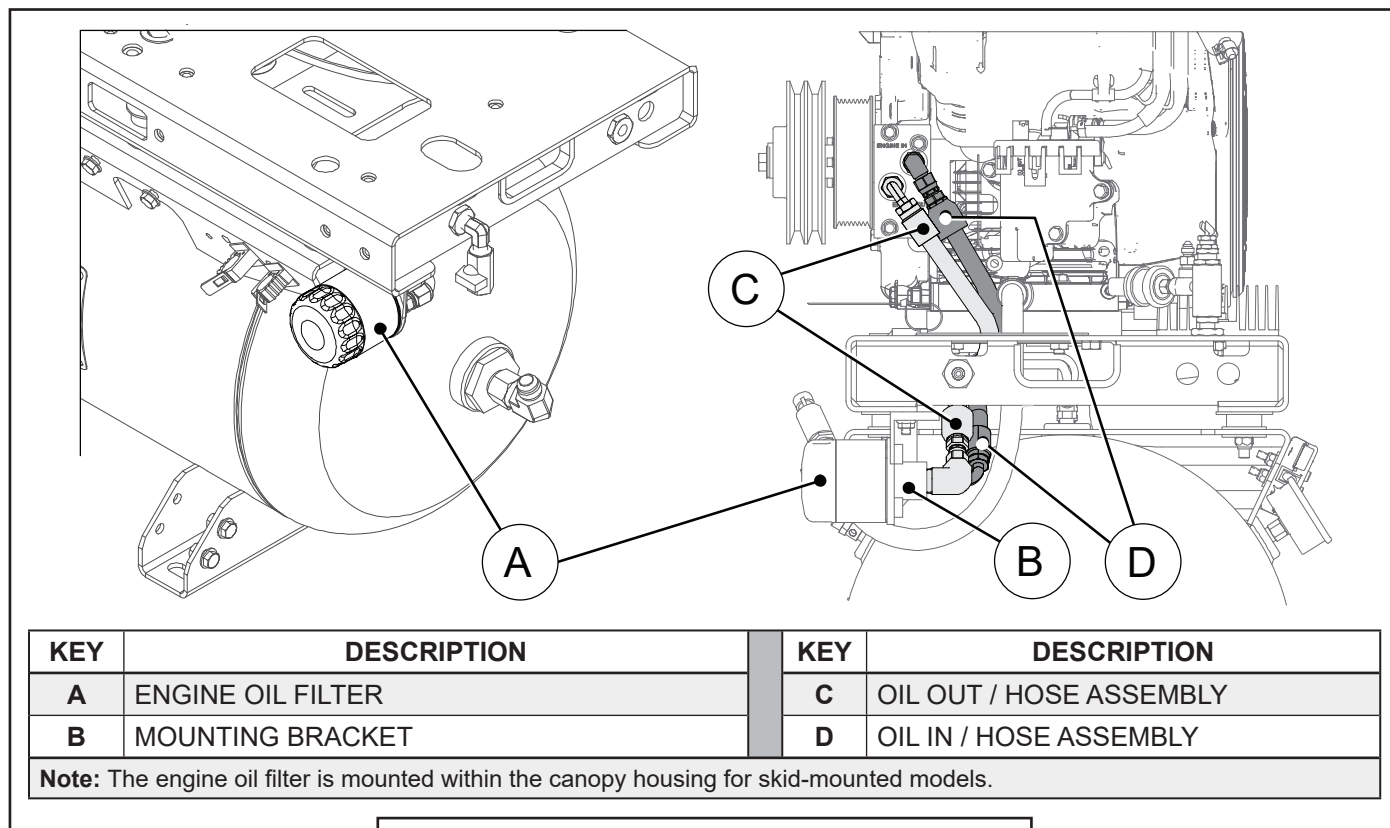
Engine Oil filter Remote Mounting Bracket
